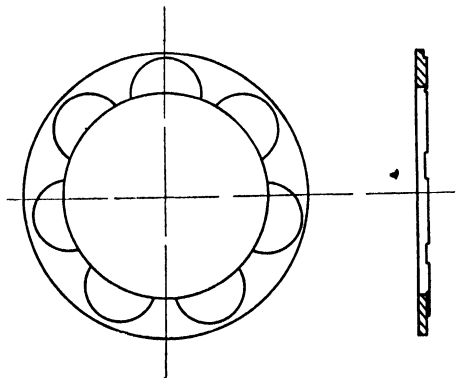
SECTIONAL VIEW OF FILTER RING.
